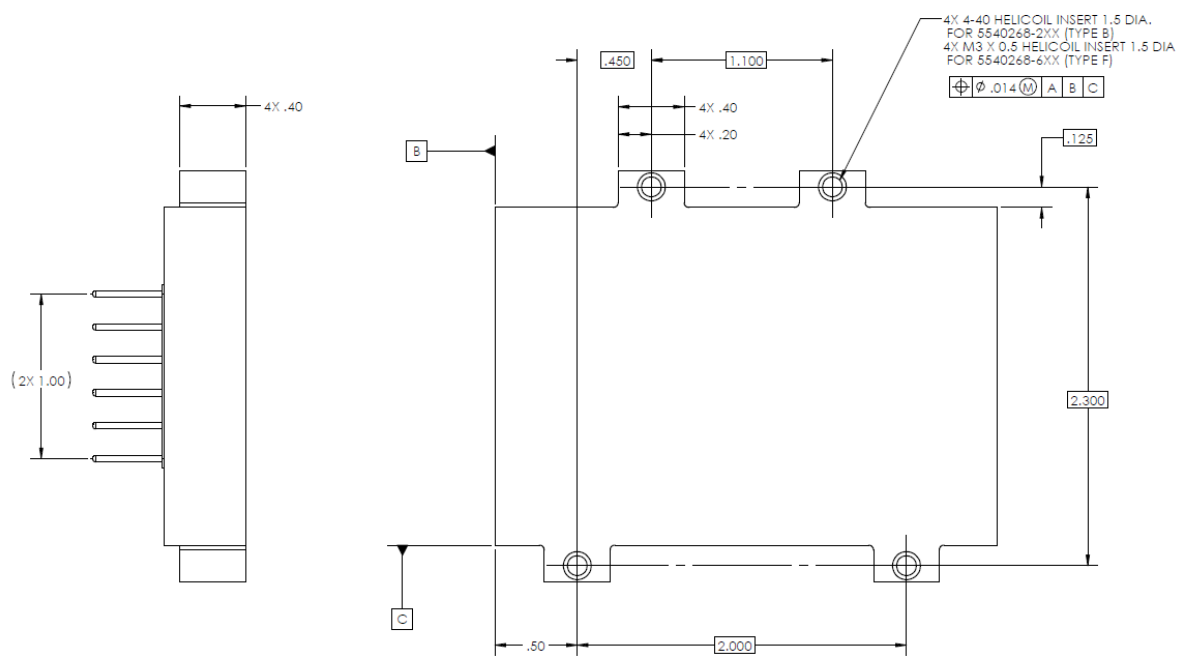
Radial Pins and Threaded Package Bottom View (-B or -F)
